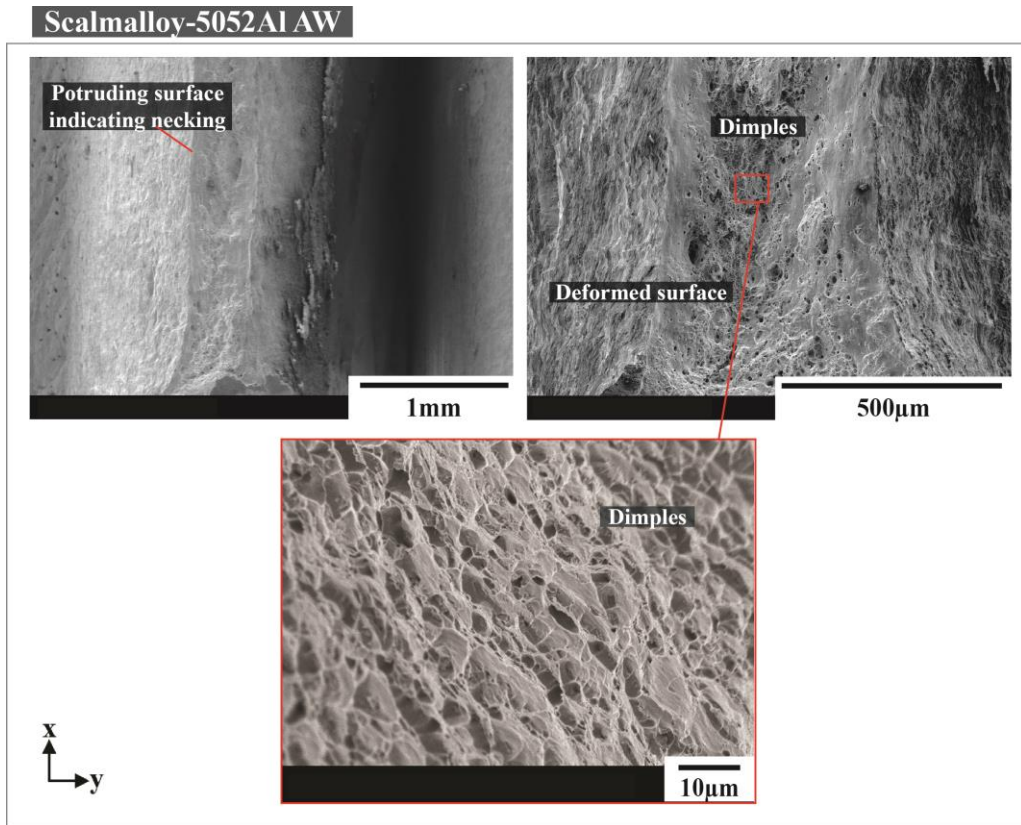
Fracture surfaces and fractured samples for Scalmalloy-5052Al as welded joint
